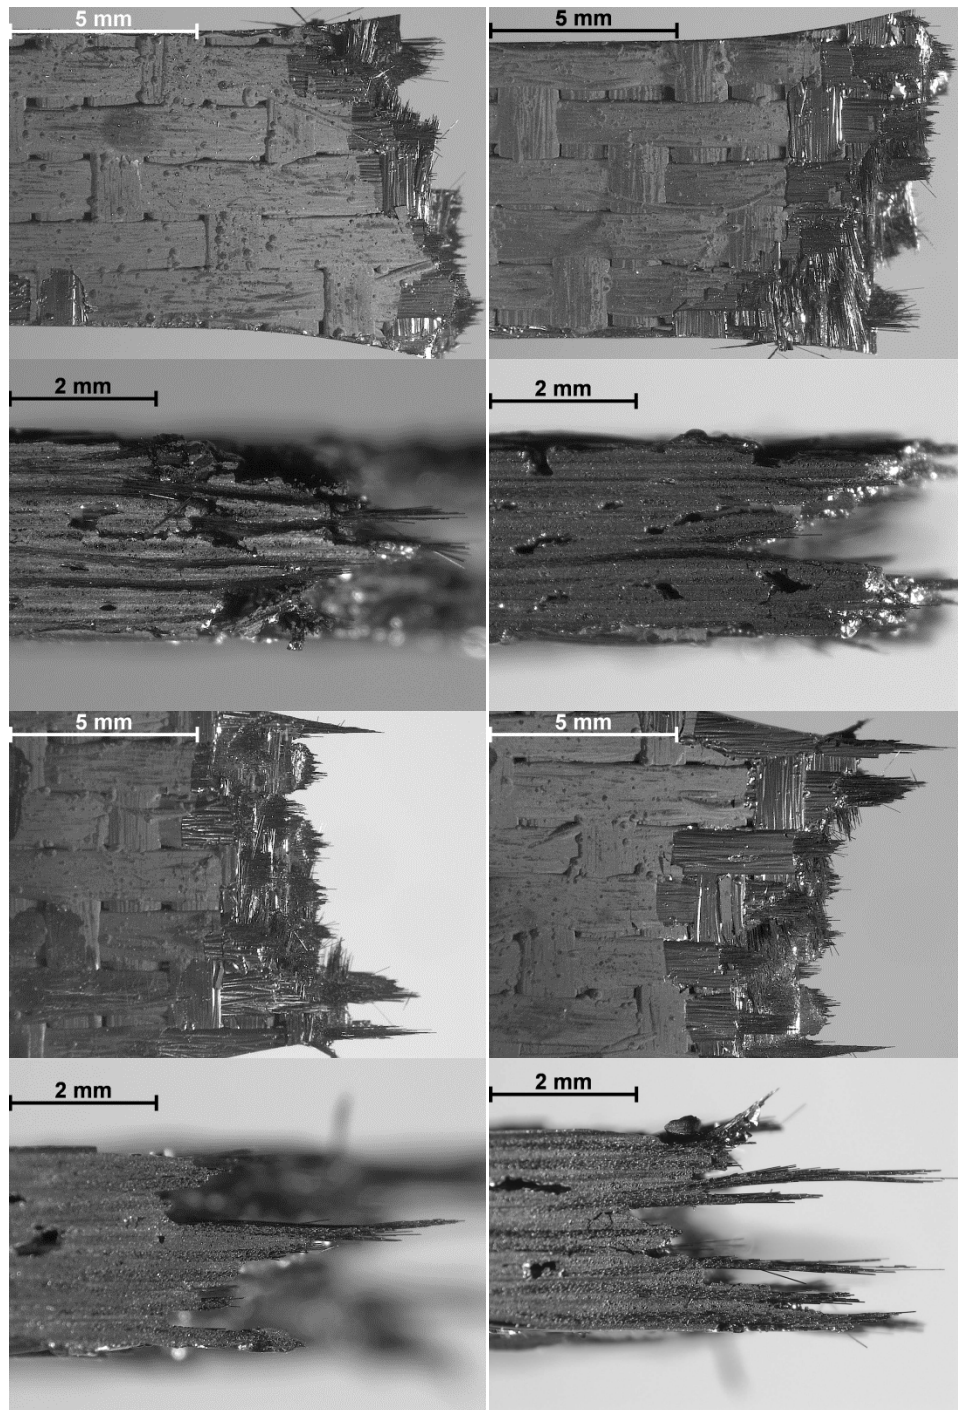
Fracture surfaces obtained in tensile test of virgin Hi-Nicalon™/HYPR-SiC™ specimen (Plate 11138, Specimen 3)
